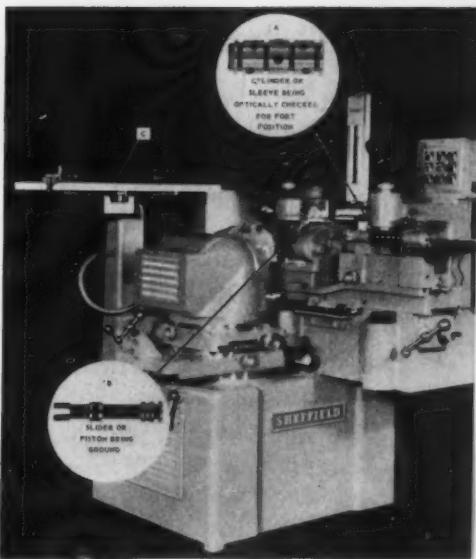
After approximately matching parts are selected, they are ground to an exact mate-match on this Optical Match Grinder.
